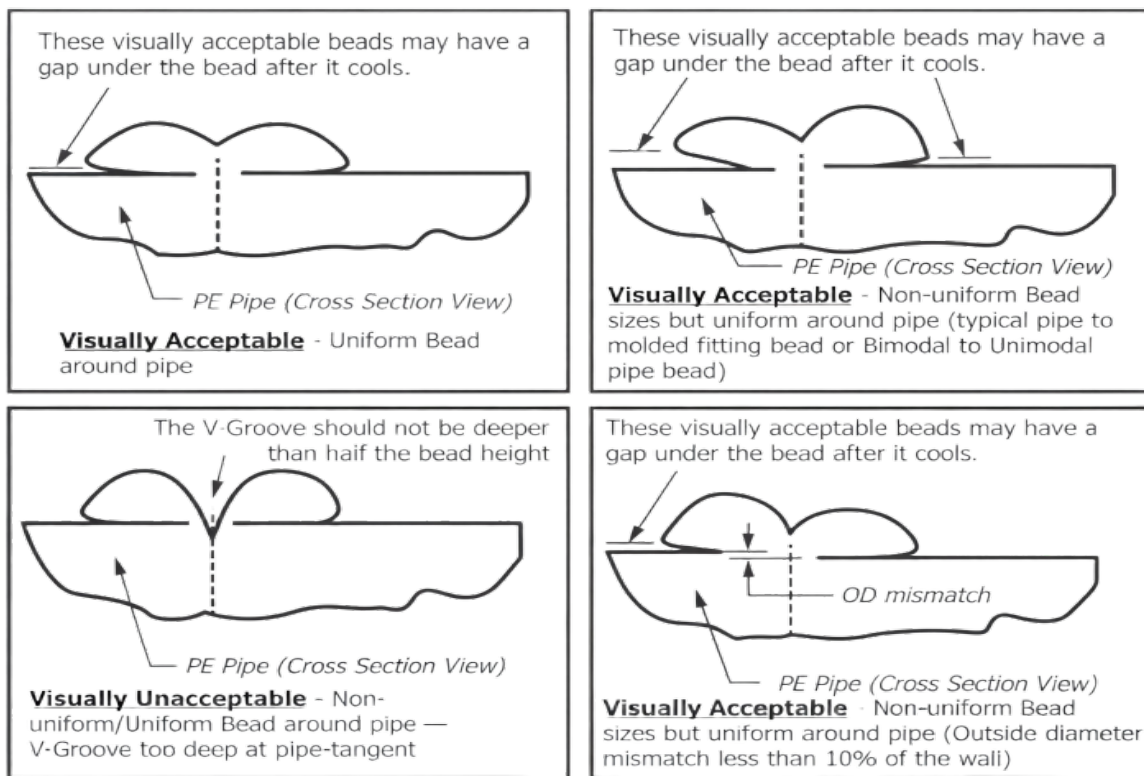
Outside Diameter Butt Fusion Bead Guidelines as per ASTM F2620
